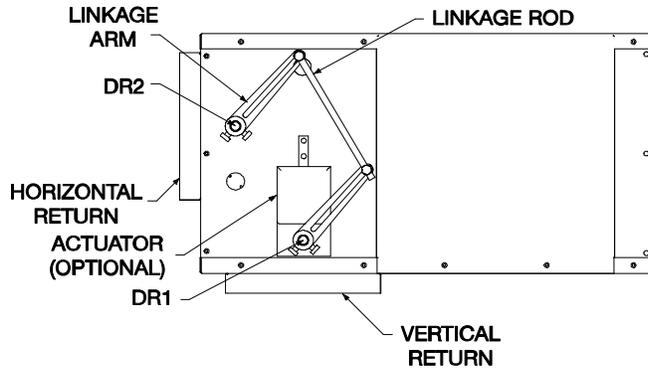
Linkage Assembly Front View (Sizes 08-12)
